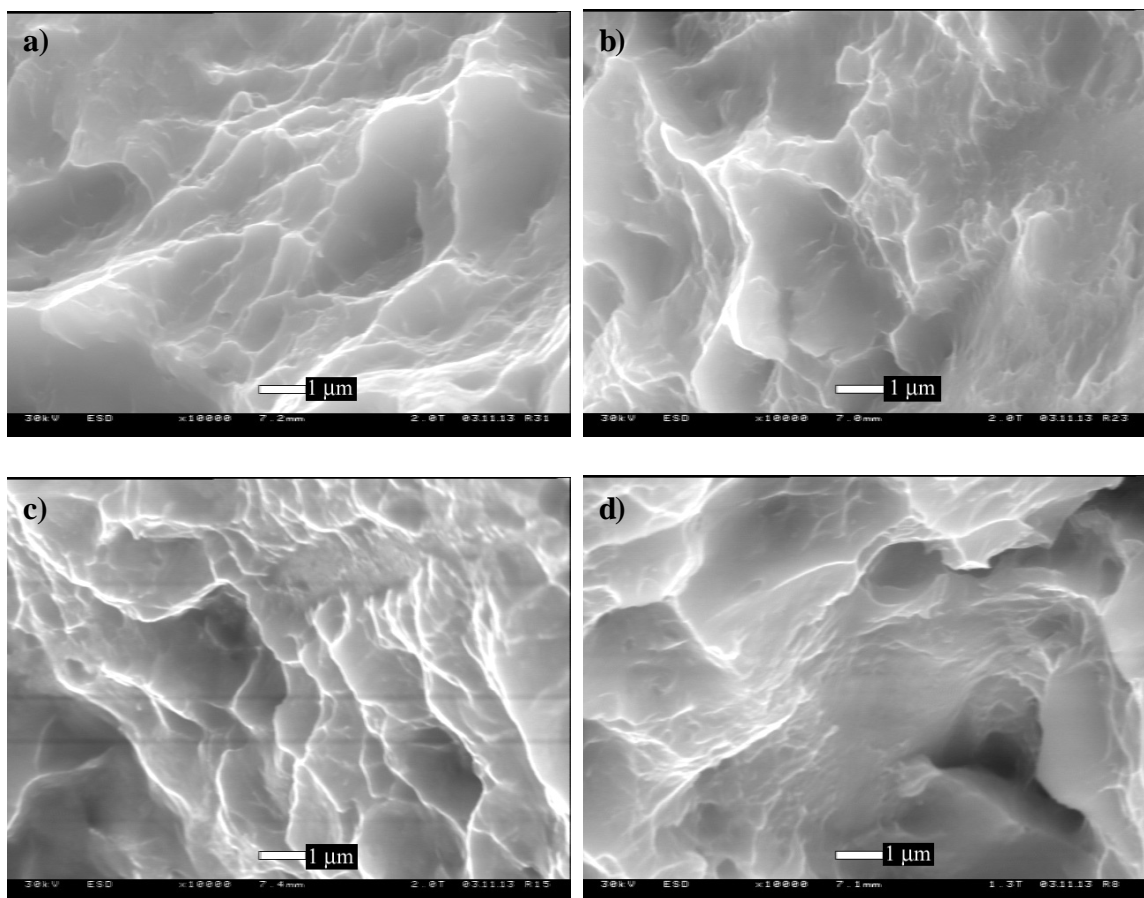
Fracture surfaces of tensile specimens, 10,000x. (a) Base metal, (b) matching filler metal weld, (c) modified 50 ppm Y filler metal weld, and (d) modified 200 ppm Y metal.
